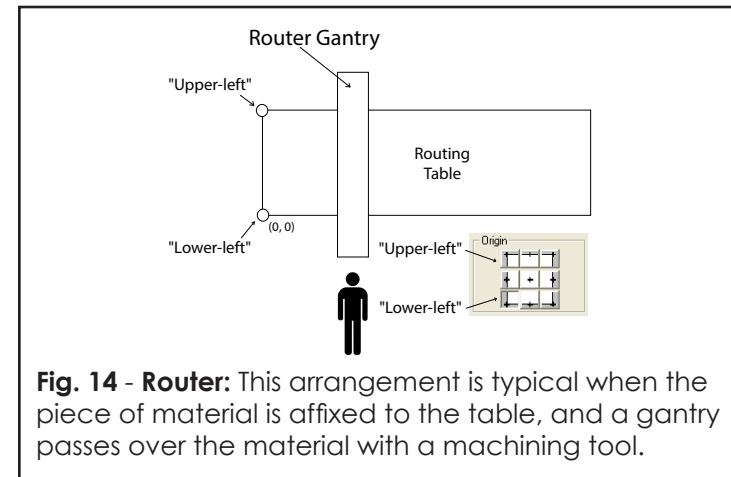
Router: This arrangement is typical when the piece of material is affixed to the table, and a gantry passes over the material with a machining tool.
